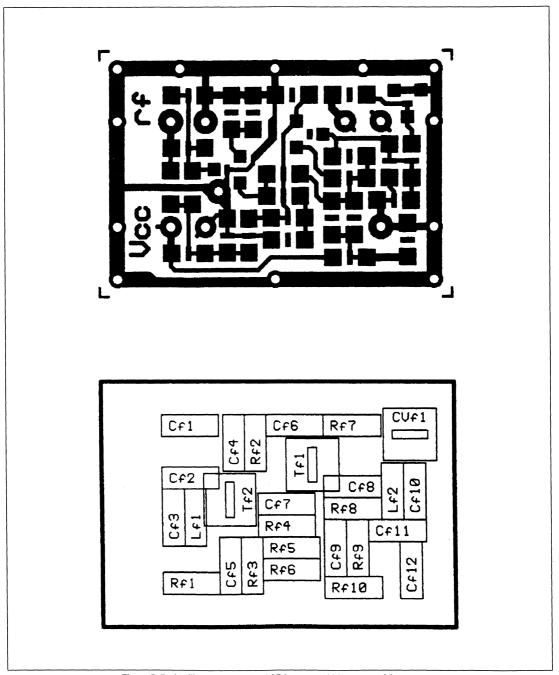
Auxiliary 100MHz VCO PCB Layout and Placement of Components
